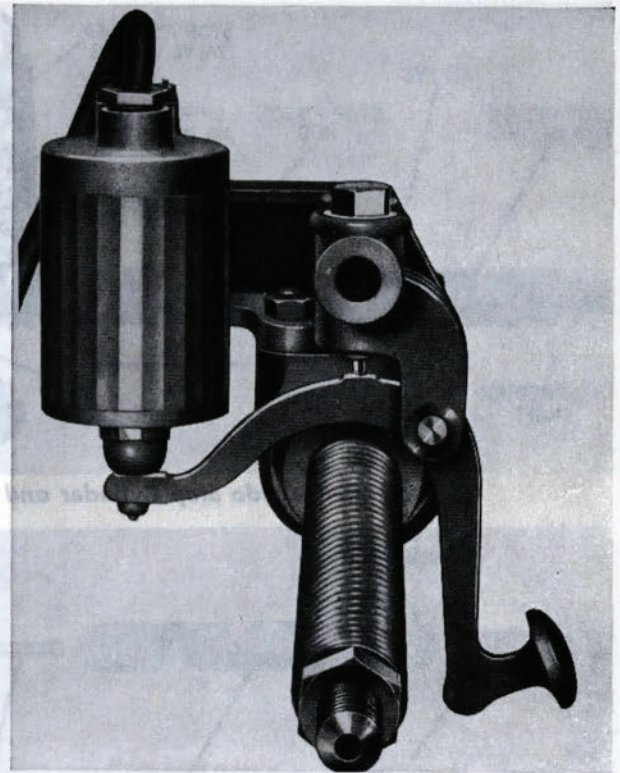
Solenoid, Firing Lever, and Stop Cylinder—Lever Hook Up—Stop Cylinder Valve Open.
